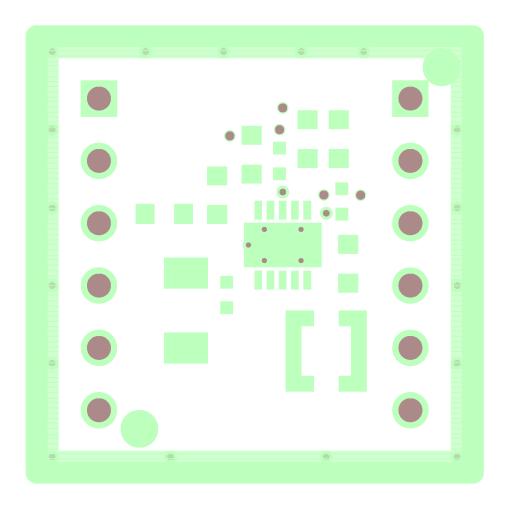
SMP-TPS61201-MVK Board Solder Mask – Top Side
